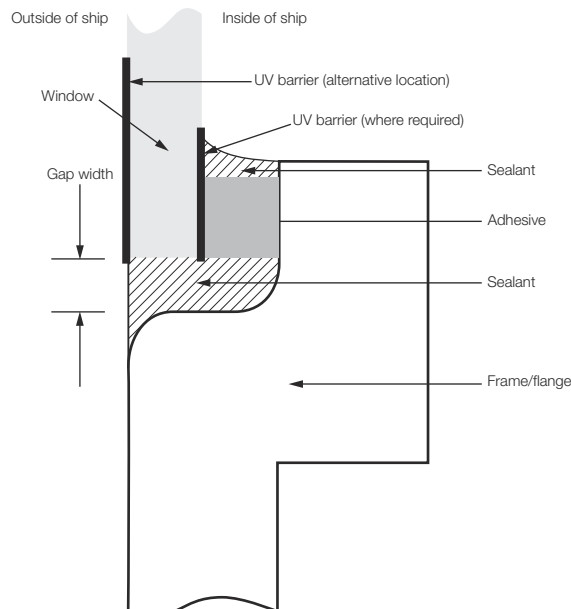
Gap width between flange and window, bonded from outside of the ship
